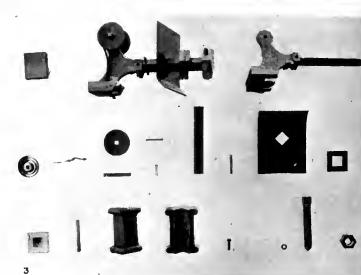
Worm wheel type adjusting mechanism for Westinghouse No. 56 railway motor
